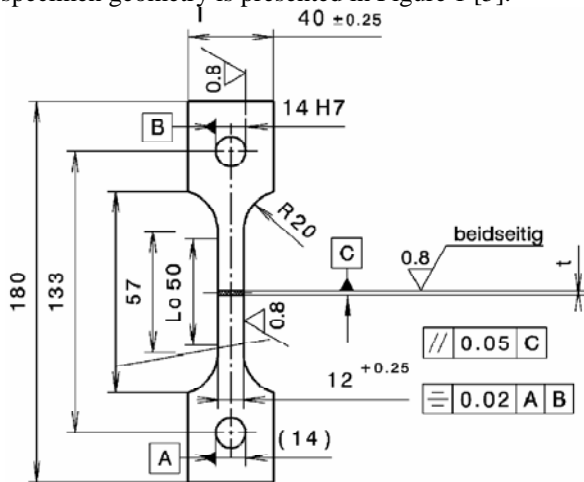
Geometry of the specimen to be used in the fatigue tests (SN).
